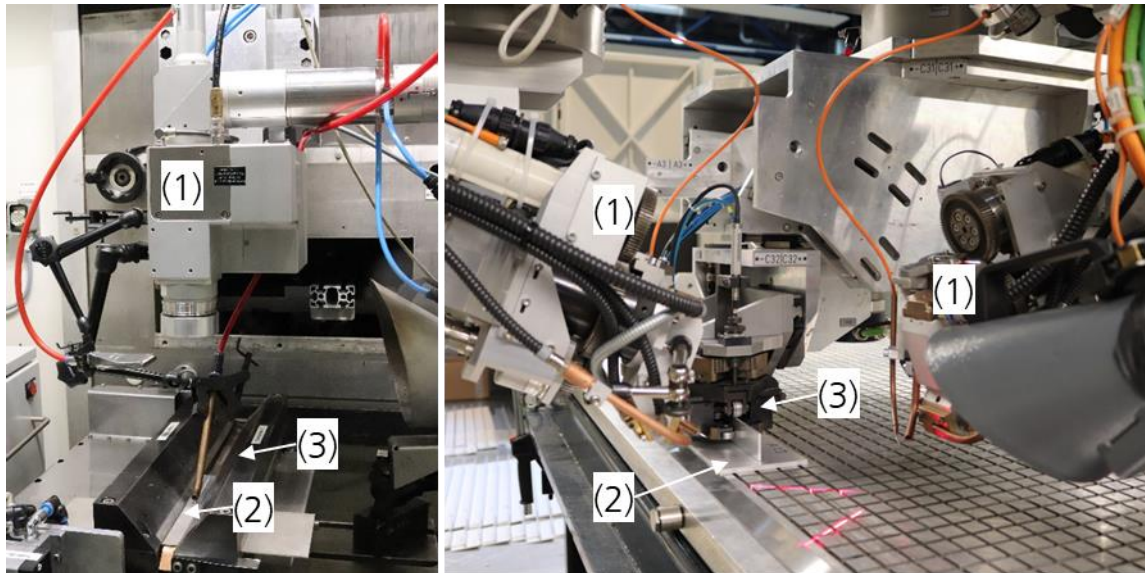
a) Welding of Butt Joints; b) Welding of T-Joints; (1) Welding head, (2) Weld sample, (3) Clamping device
